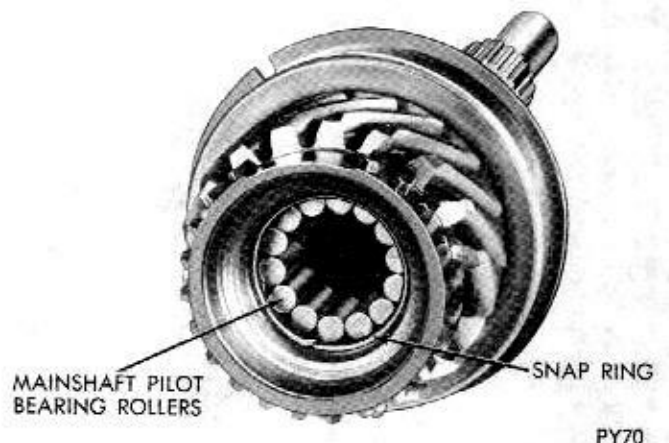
Mainshaft Pilot Bearing in End of Drive Pinion
